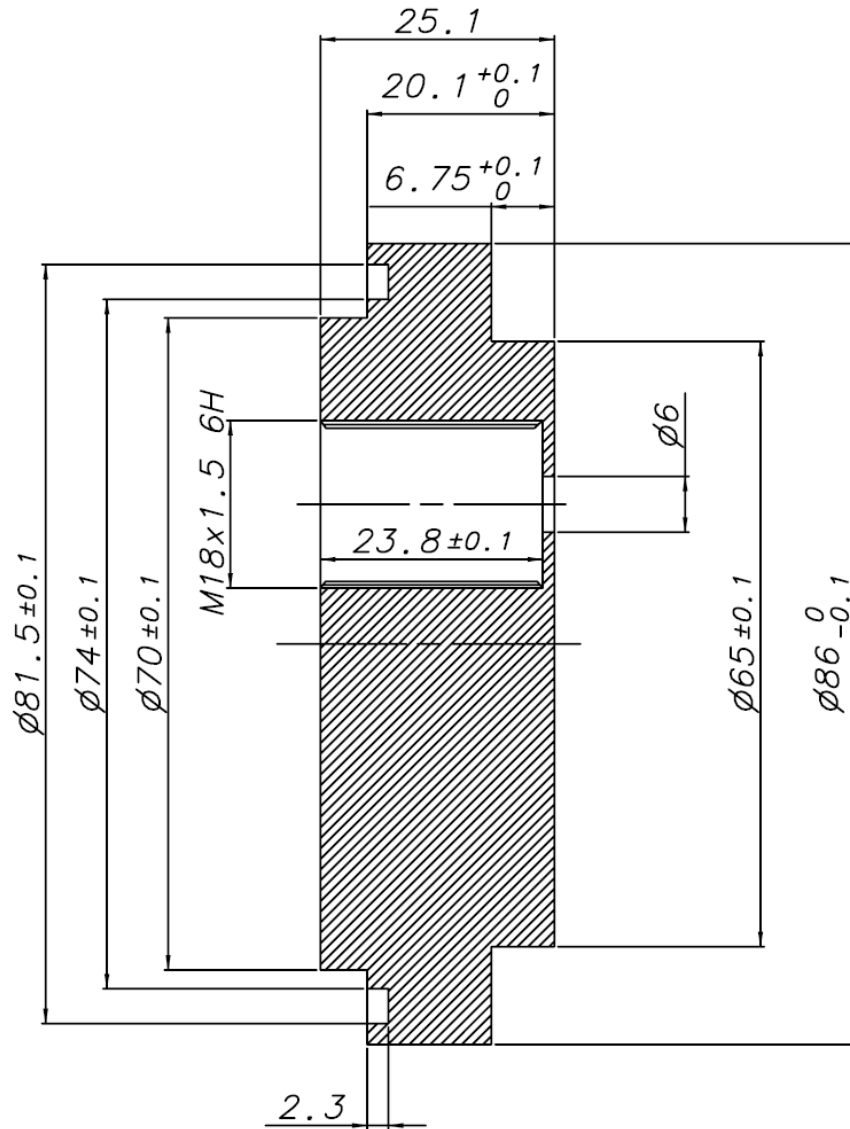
Technical Drawing of Sensor Holder Apparatus
